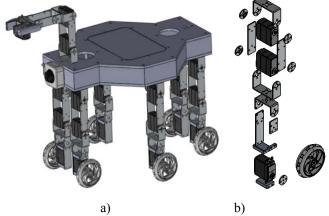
a) Overall hexapod design b) exploded view of one leg
